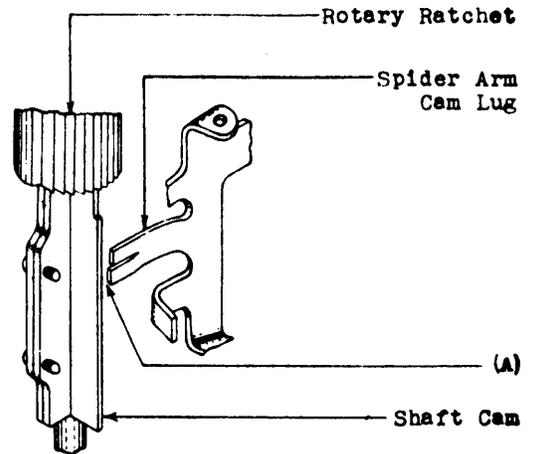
Relationship of the Spider Arm Cam Lug and the Shaft Cam
